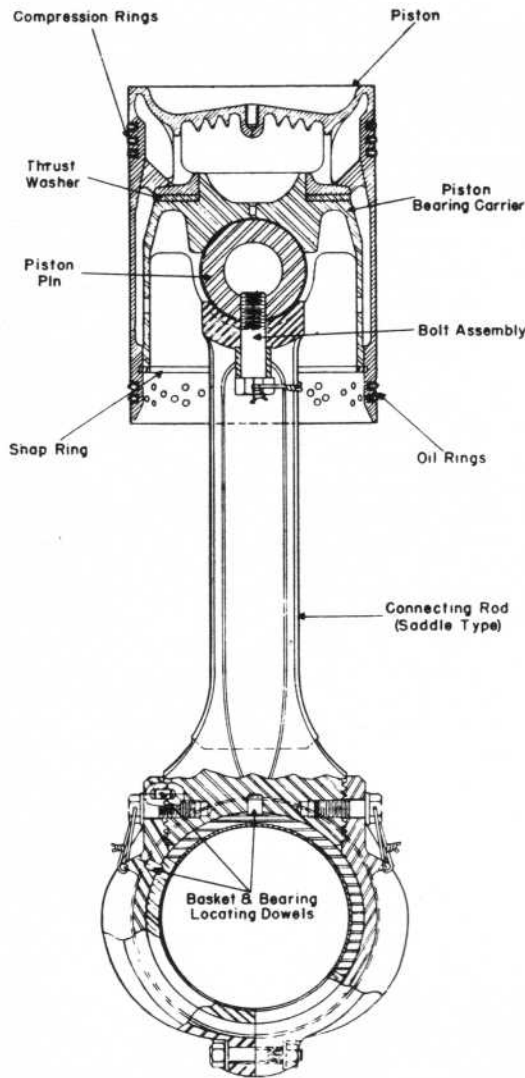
Cross section through cast iron oil-cooled 8½-in. dia. piston and the forked connecting rod
